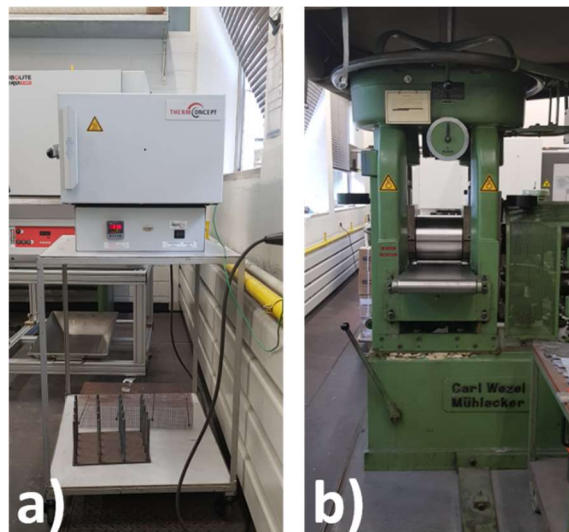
a) Thermoconcept Furnace used for heating, b) Carl Wezel Rolling Mill.
